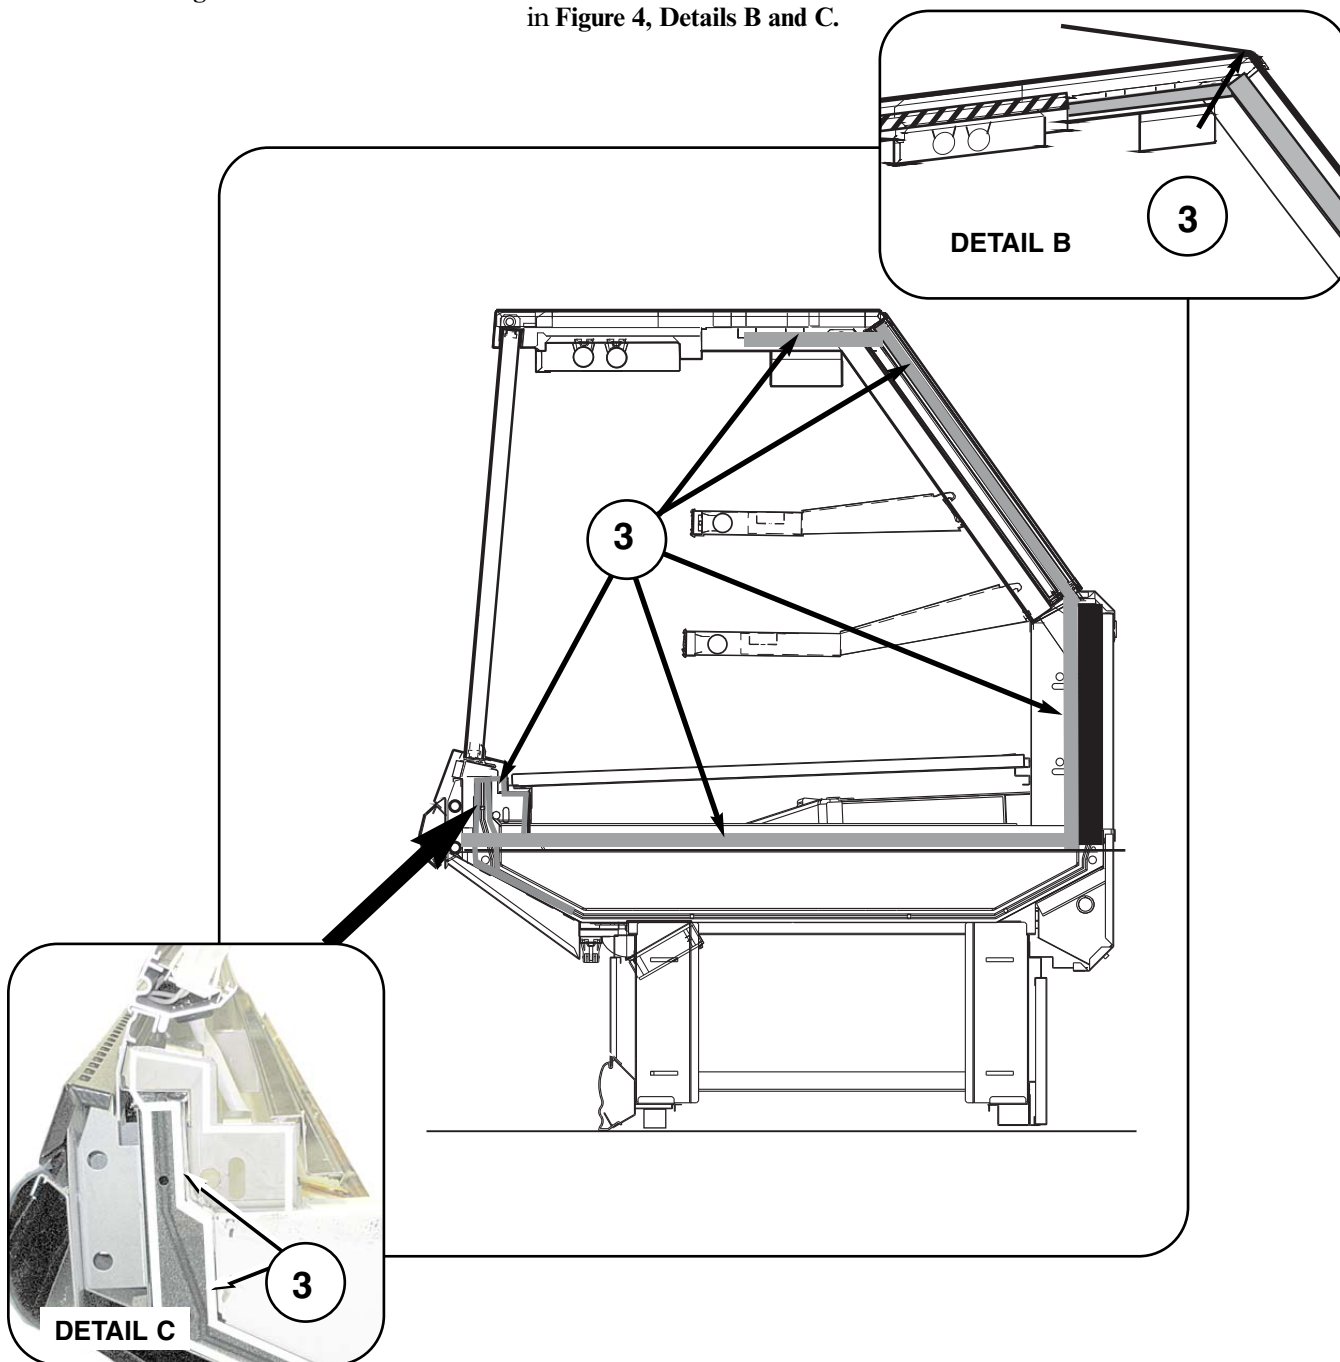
Apply 1 1/2 in. Gasket to the Merchandisers
